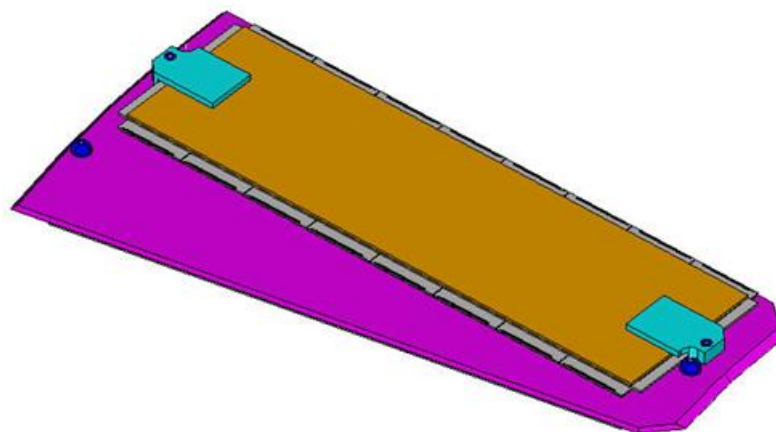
FPIX Upgrade Blade - identical blades are used in the inner and outer assemblies of all half disks.
